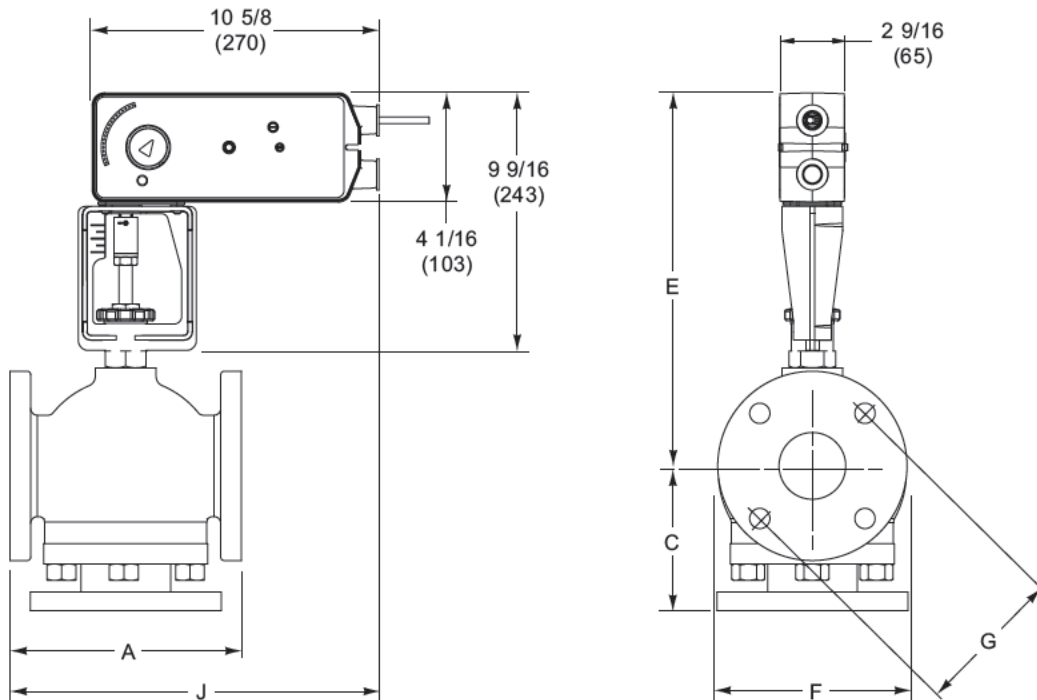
Mx61-720x with 2-1/2" to 4" 3-Way Flanged Globe Valve.
